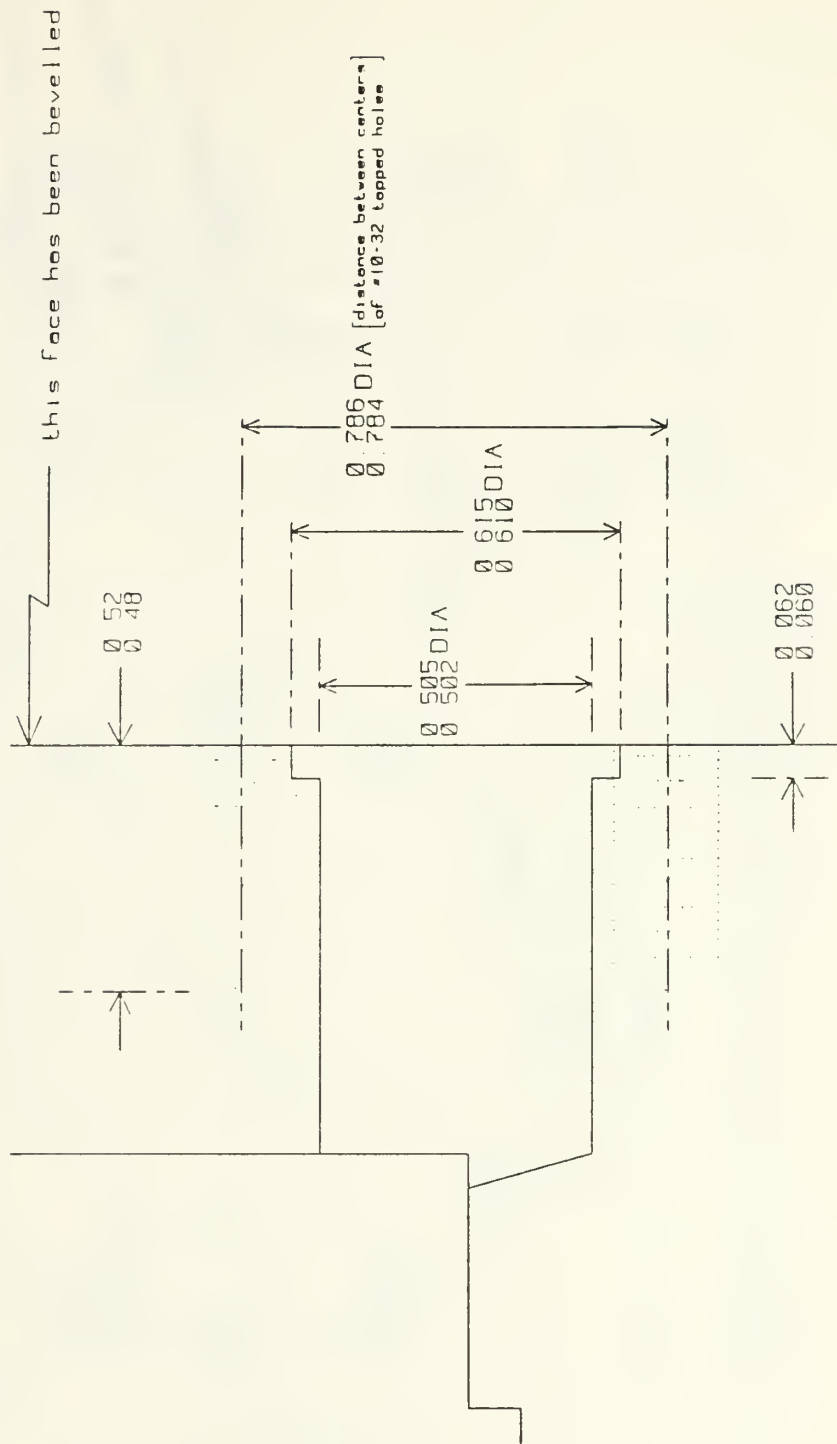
Close-up Cross-sectional View of the DC Pressure Transducer Port
